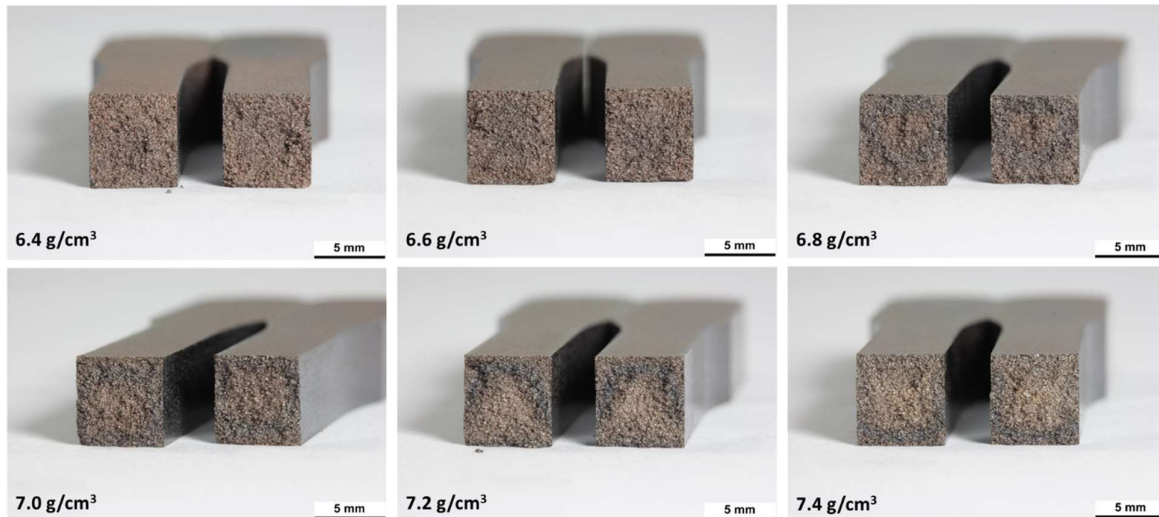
Images of fracture surfaces of cured Somaloy samples
